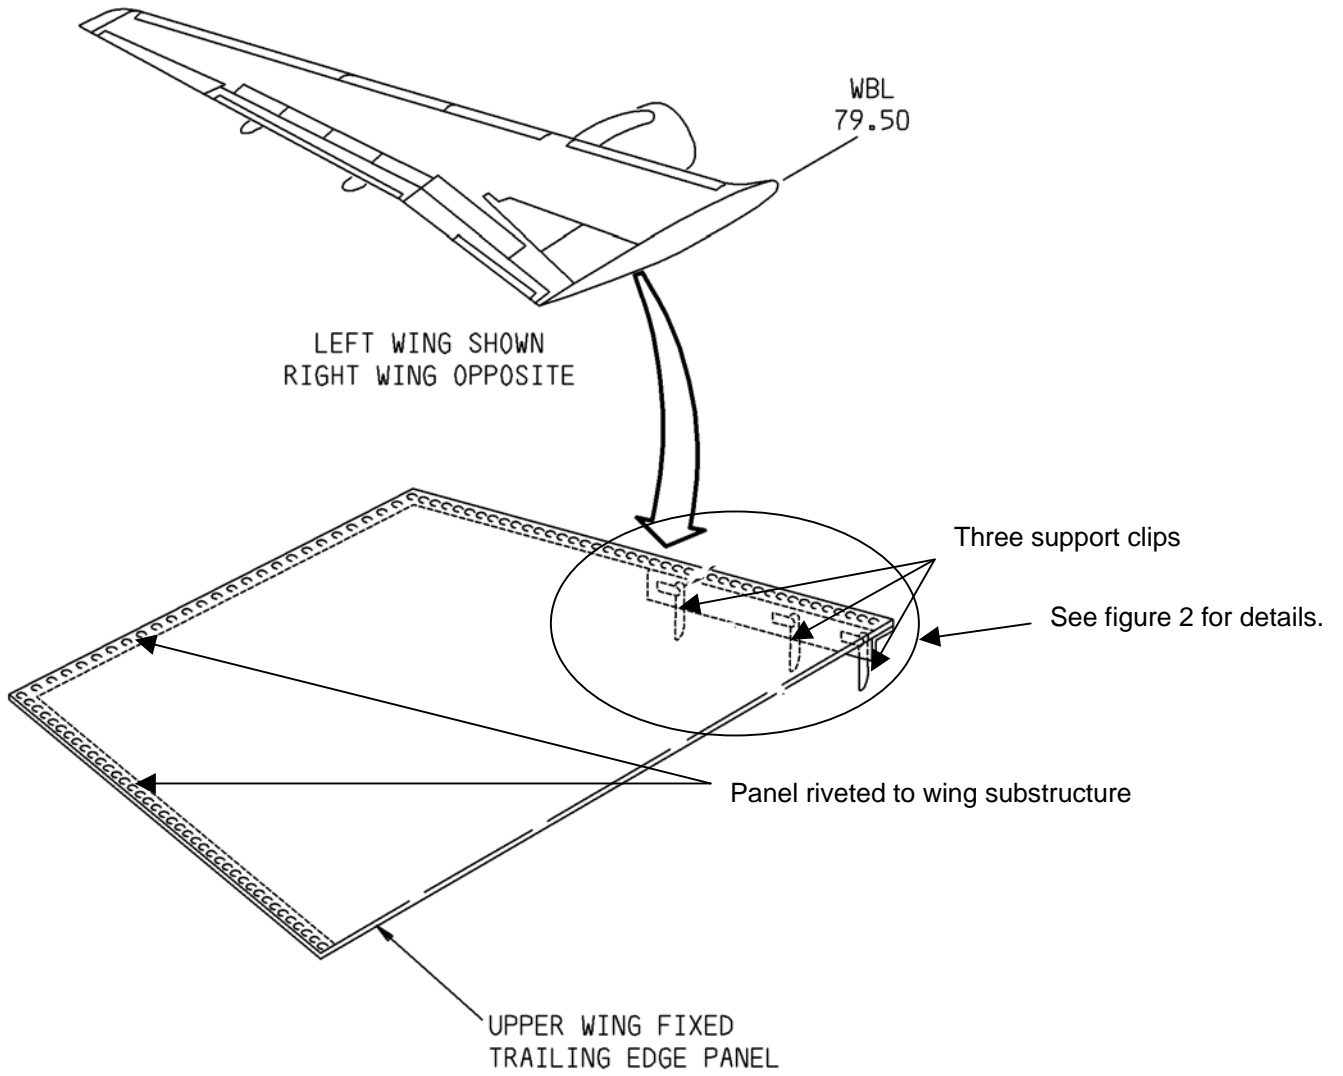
Boeing 757 upper wing fixed trailing edge panel
